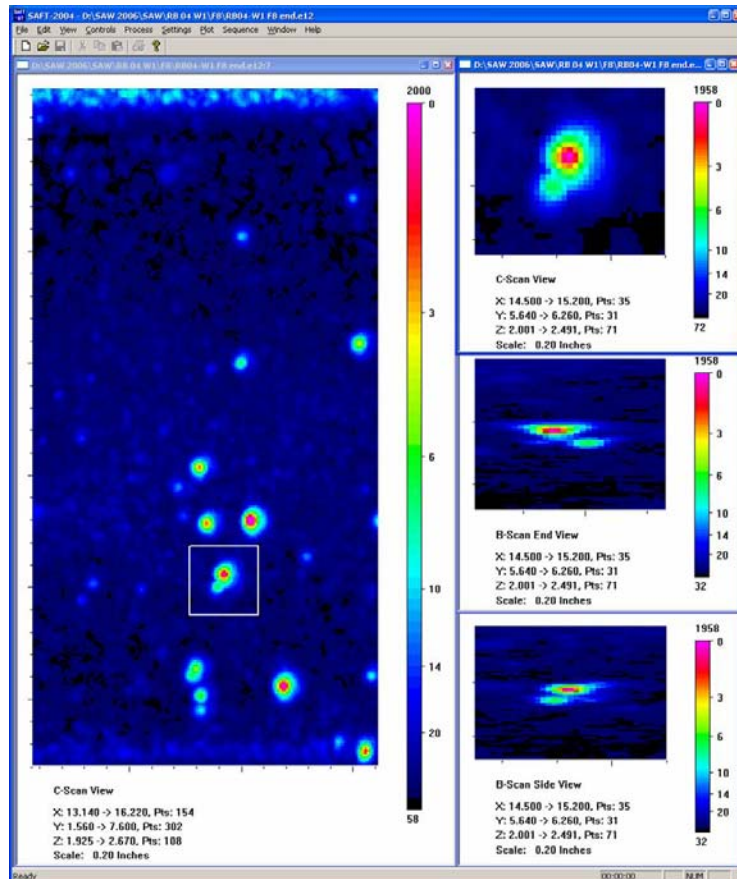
a 10 MHz F8 Immersion Testing Images of Small Fabrication Flaw: RB1A. This figure shows immersion testing data of a 5.5-mm flaw indication from the weld-normal testing of large weld segments. The flaw indication is identified in the box drawn in the SAFT-UT image on the left in the figure. A close up of the flaw in the C-scan view (top right) shows 2 unresolved flaws.
